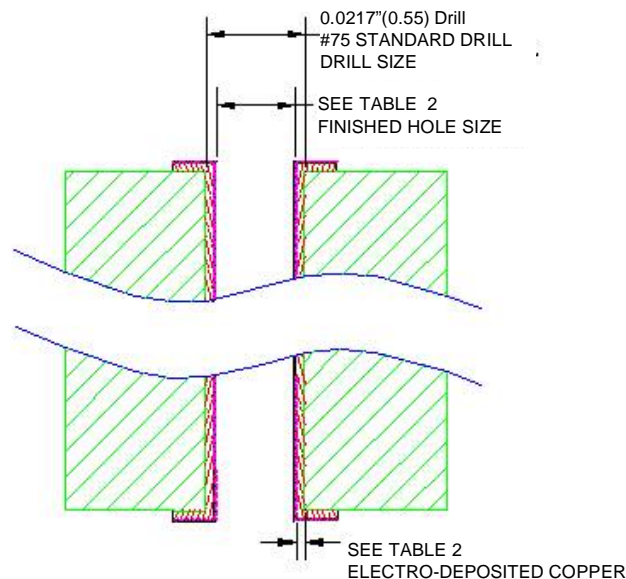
VIPER Drill and Finished Hole Size for Daughtercards
